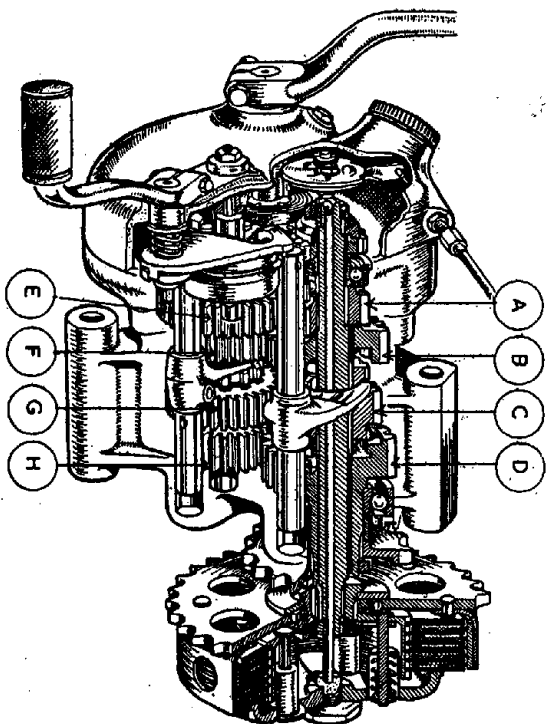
CUTAWAY VIEW OF THE B.52 GEARBOX.
